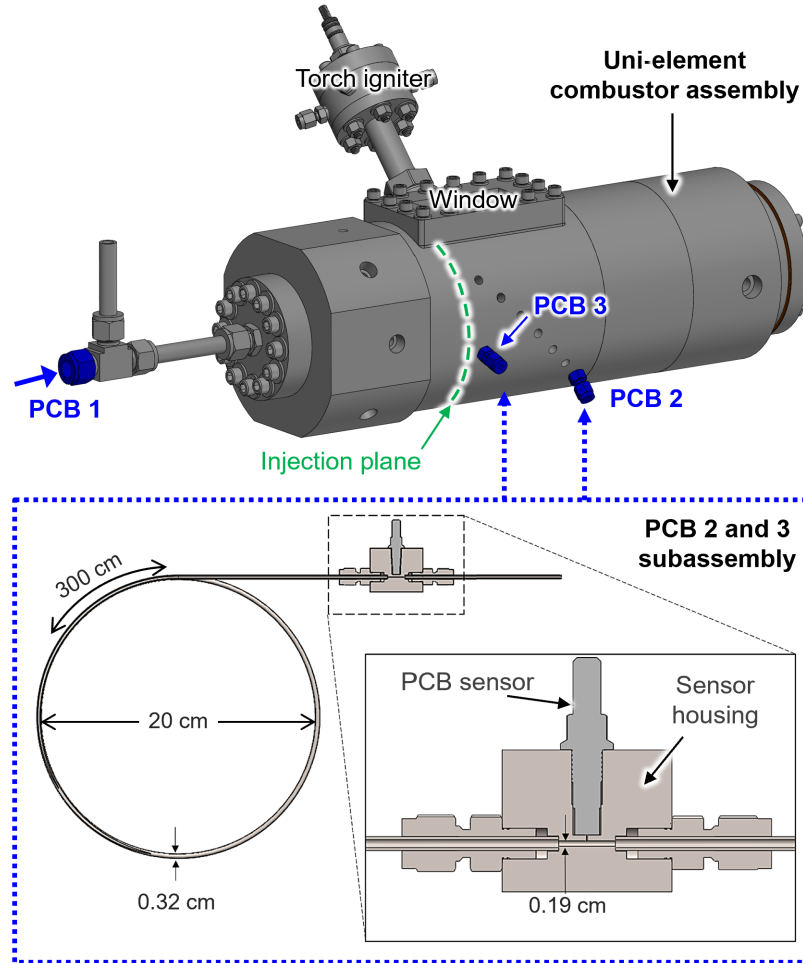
PCB dynamic pressure sensor setup and positioning on the single-element combustor.
